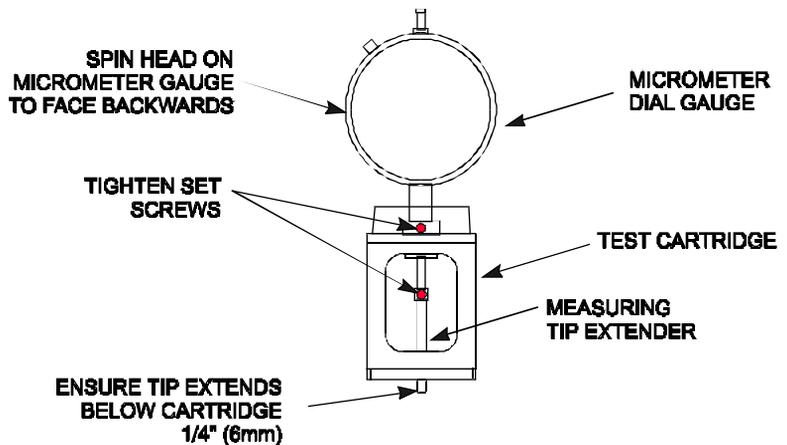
Setting Up Tools from Height Gauge Kit.
